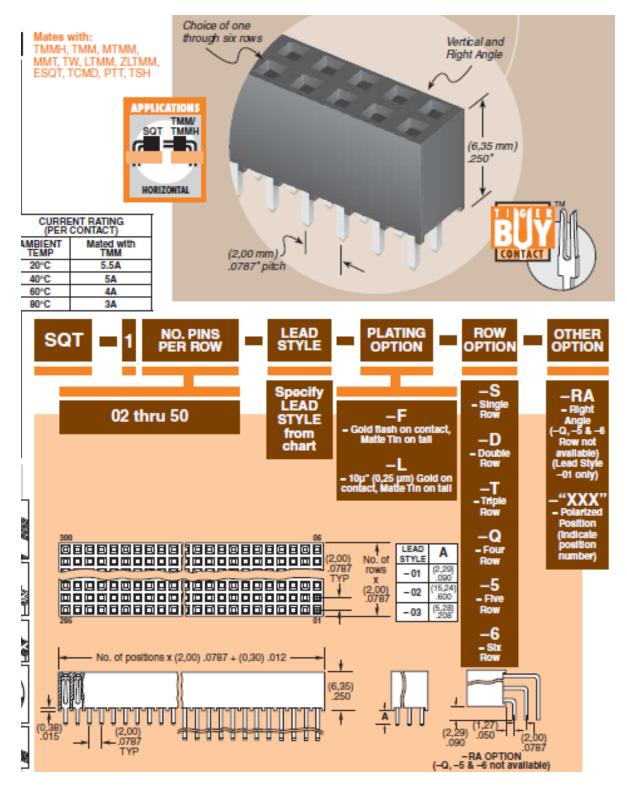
SQT Board-to-Board Electrical Connectors (image courtesy of http://www.samtec.com/technical-specifications/Default.aspx?SeriesMaster=SQT)
